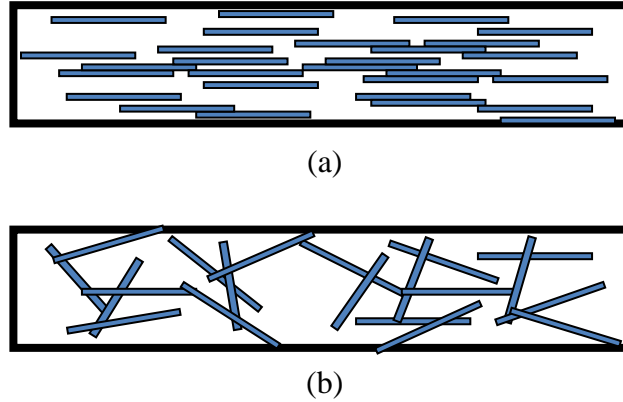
Fiber dispersion and alignment caused by (a) injection molding (b) compression molding
